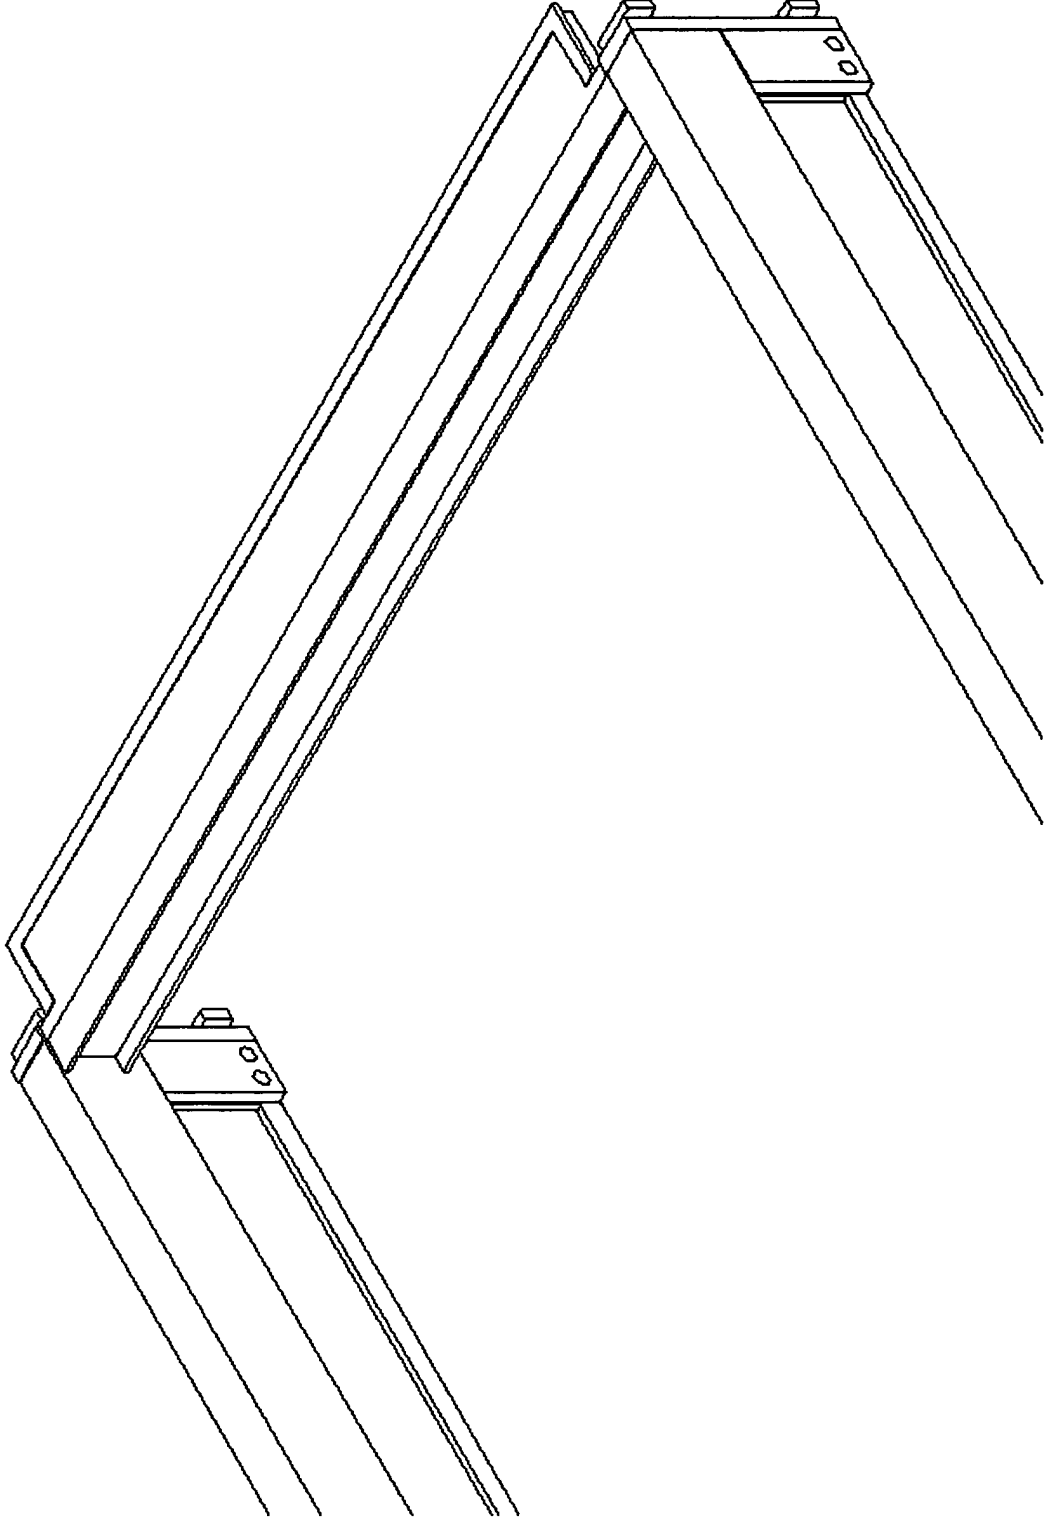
B: Isometric view of the left end of a ceiling frame (40 foot high cube collapsible cargo container)
